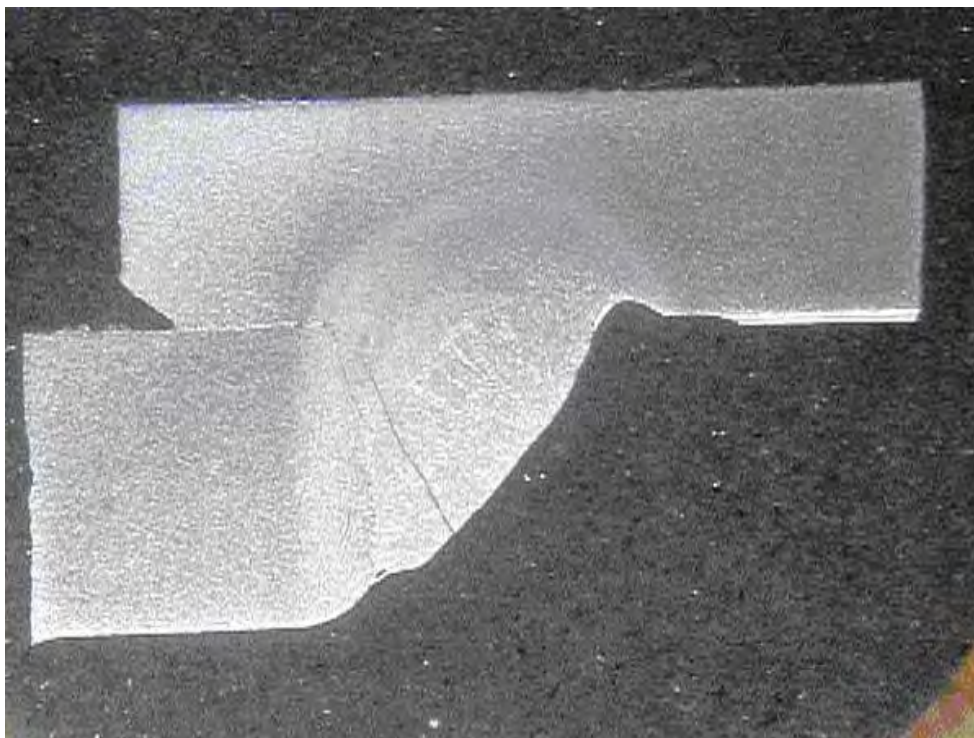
Cross-sectional view of the crack in the socket weld in Figure 3-41-1.
